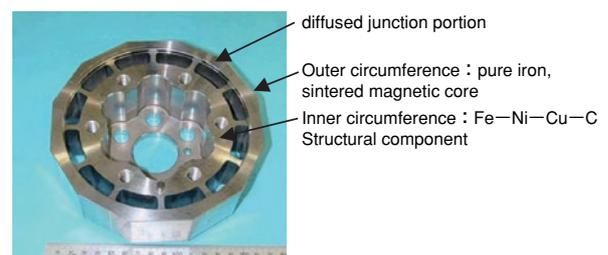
Rotor core for motor of HEV by diffusion bonding at sintering
